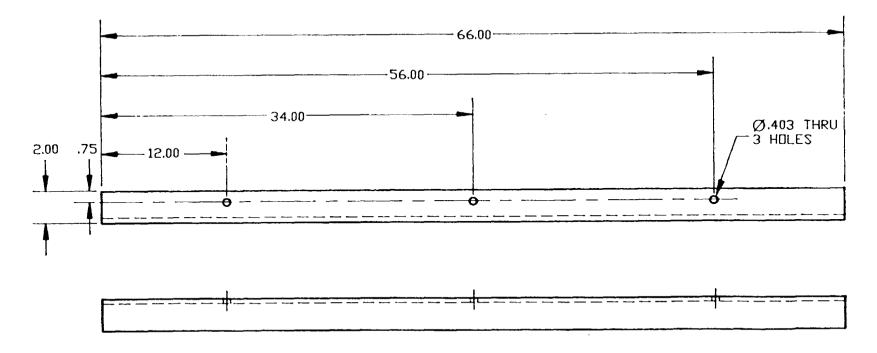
Tool Box Rack Assembly Part Number 20089720-5 (Sheet 5 of 11)
